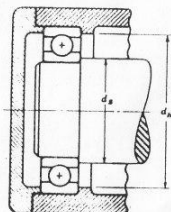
Shaft and housing shoulder diameters d_s and d_H should be adequate to assure good bearing support.
